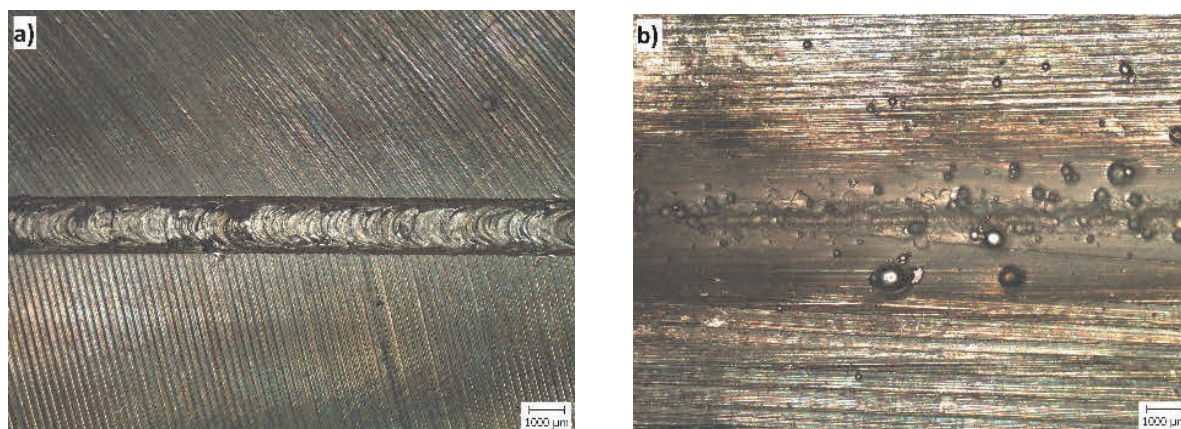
Sample S7: a) the head of weld; b) the root of weld
